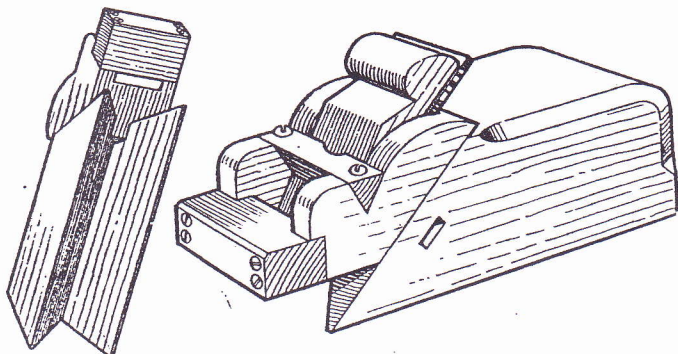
TWO VIEWS OF THE COMPLETED PLANE. The left-hand drawing shows the plane tilted upwards revealing the sole. It will work any chamfer, at 45 deg., up to the limit of its cutter, 1 1/4 in.
